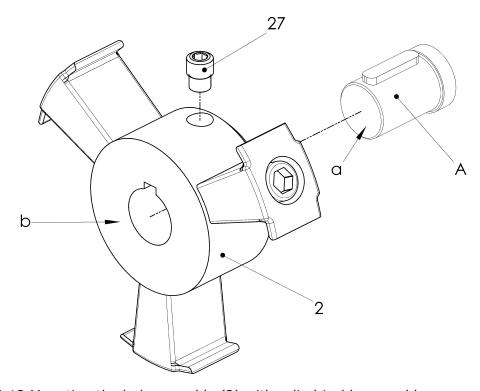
Mounting the hub assembly (2) with cylindrical bore and keyway
